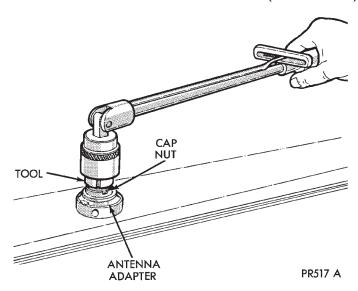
Antenna Cap Nut and Adapter Remove/ Install - Typical
